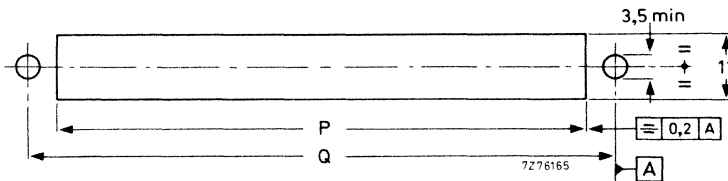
Panel cut-out; see Table 4 for dimensions P and Q.
